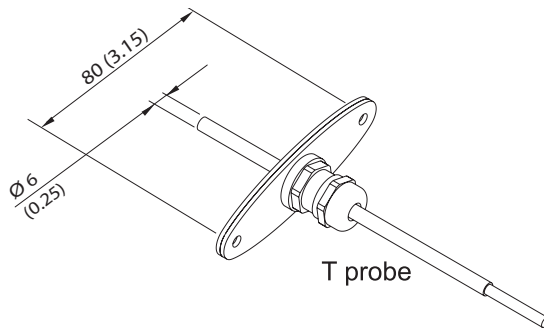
Flange for T probe Ø6 mm (1/4"), HA010207
